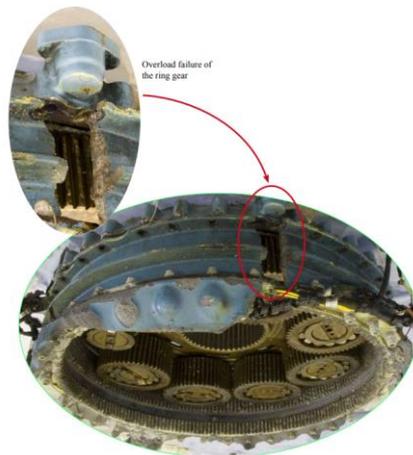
Reassembly of the fractured gearbox part of helicopter G-REDL[19]
